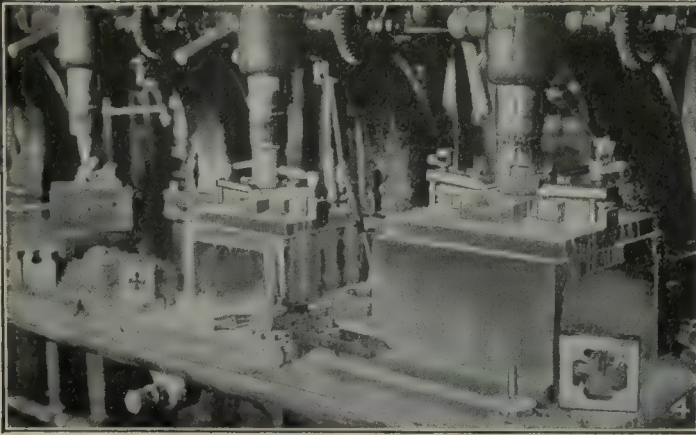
TAPER-REAMING THE SOLID DIES PREPARATORY TO CHASING THE THREAD
